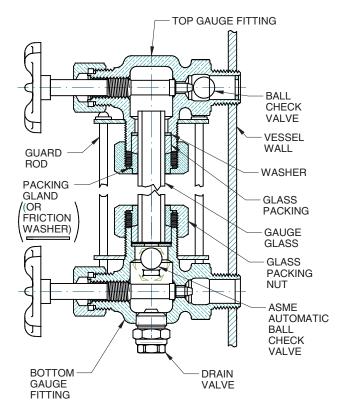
STEAM SIGHT GAUGE GLASS
